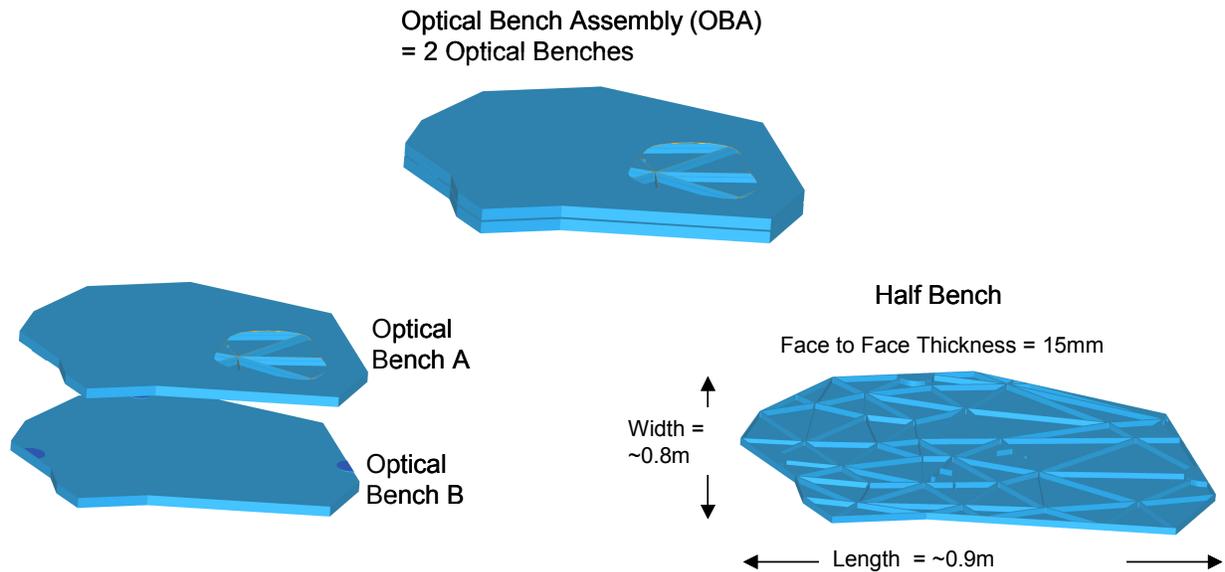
Optical Bench Assembly configuration showing a portion of the facesheet removed to show the internal rib structure.
